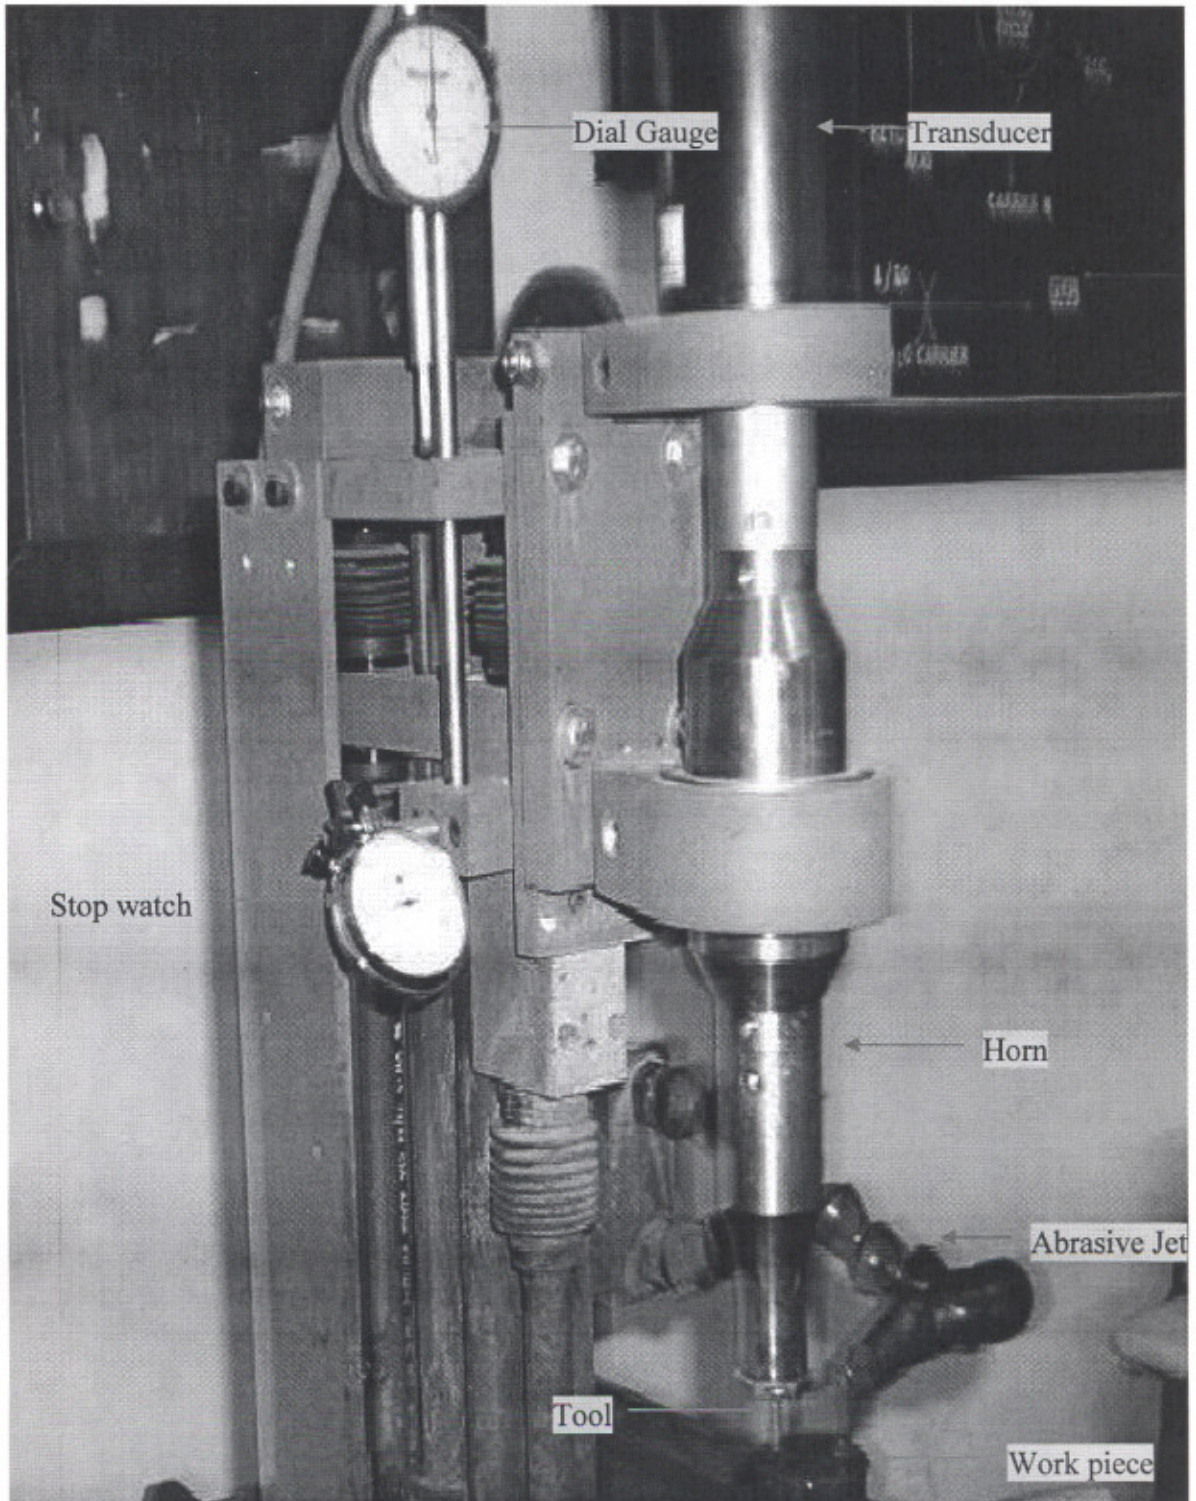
D Pictorial view of Sonic ultrasonic drilling machine
